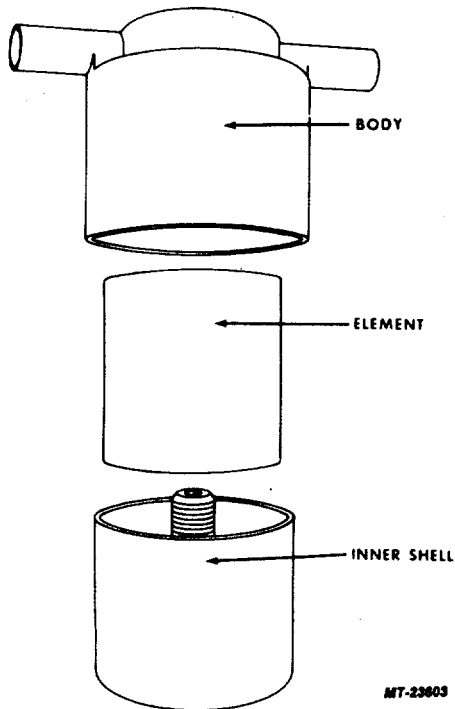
Exploded View of Replaceable Element Type Air Cleaner
